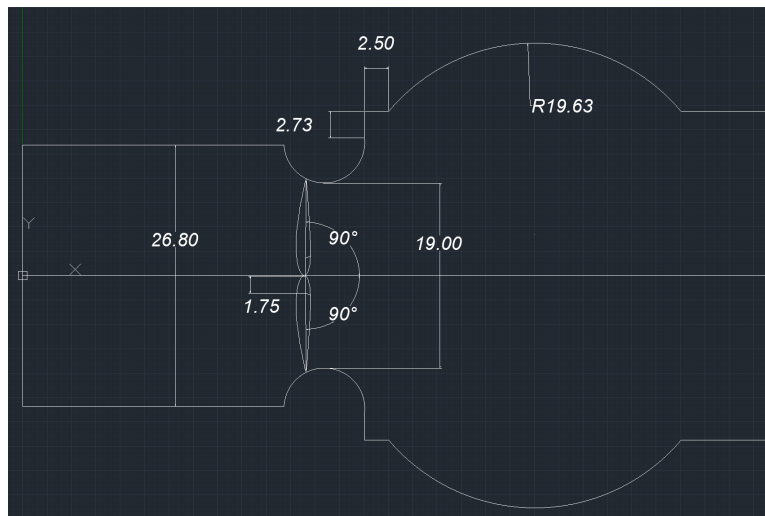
2D Valve fully closed at 90° (All units in millimeters)
